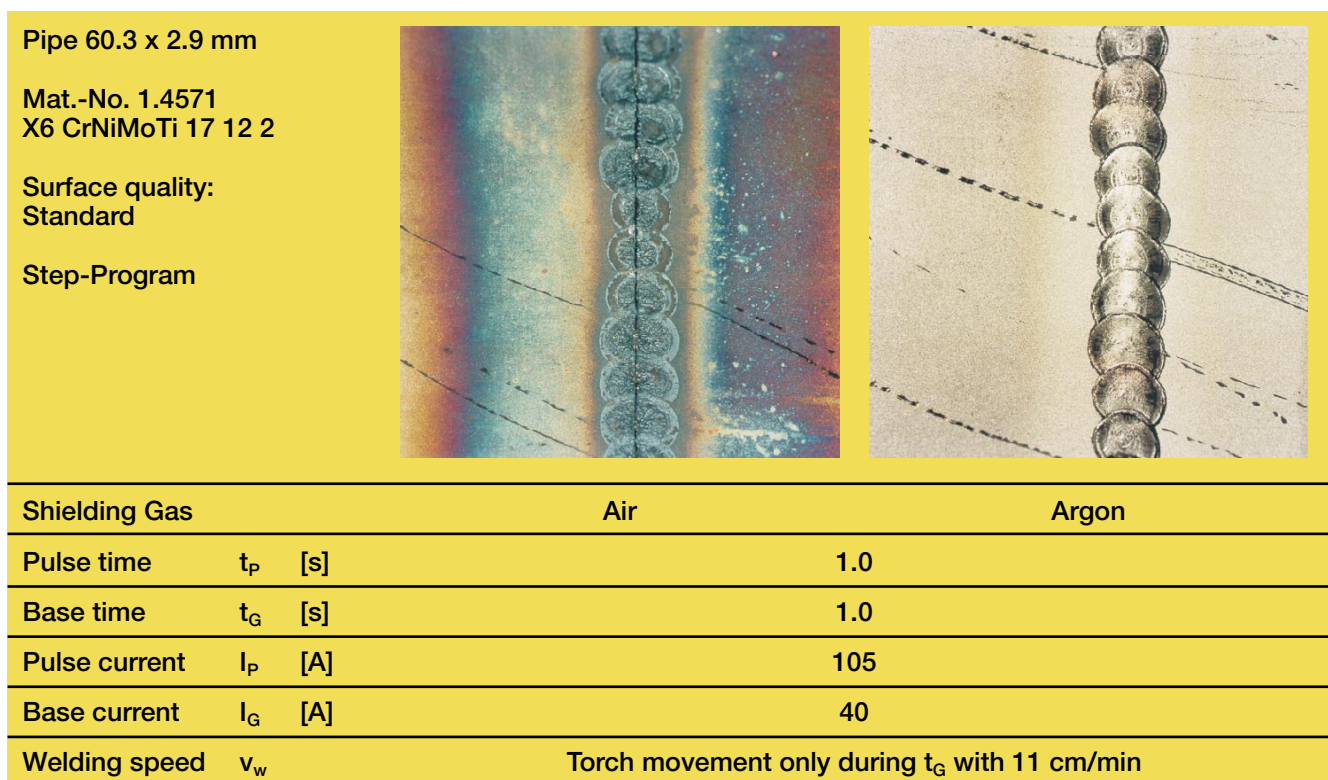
Formation of the weld seam root without and with root shielding
